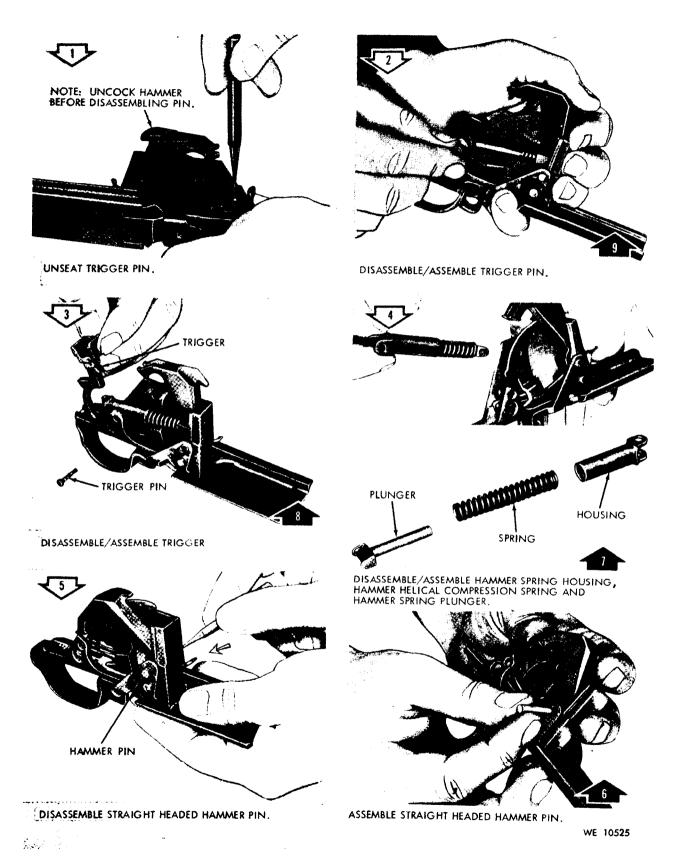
Disassembly/assembly of trigger housing assembly. (1 of 2)
